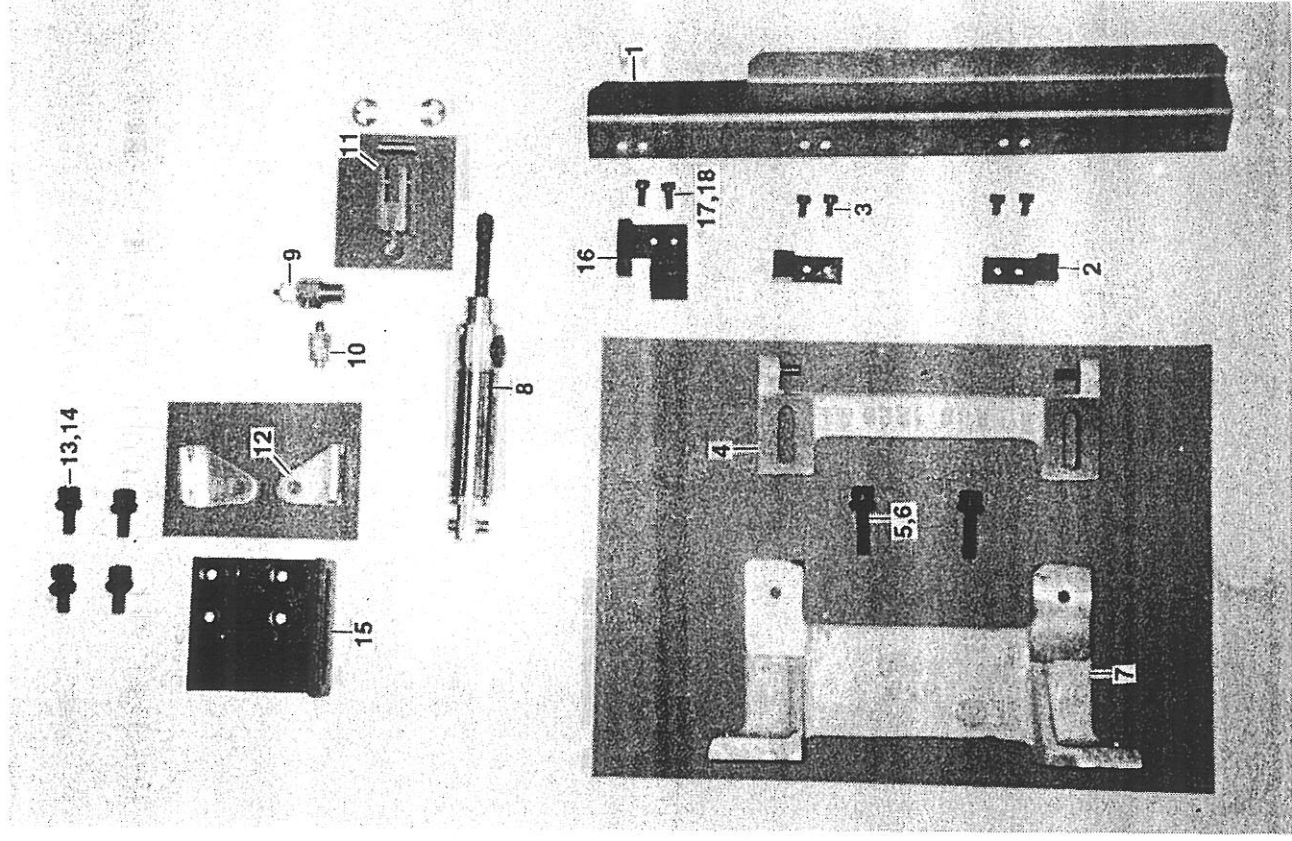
B PALLET-HANDLING PARTS: Pallet Loading (LH)
